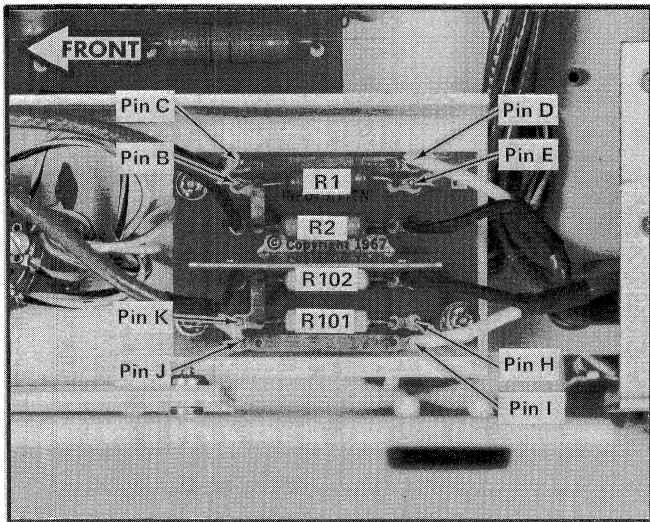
Right side interior view with lower right cabinet frame section removed to show Attenuator board pin connections.
